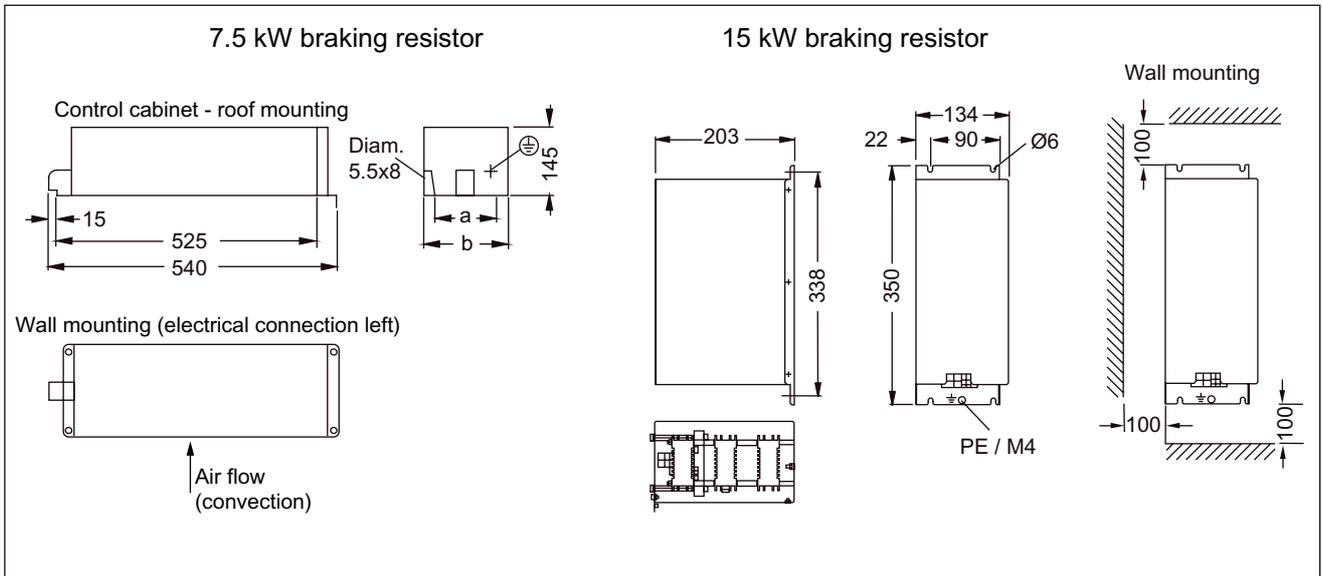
Dimension and installation drawing for braking resistor 7.5 kW and 15 kW, all dimensions in mm
